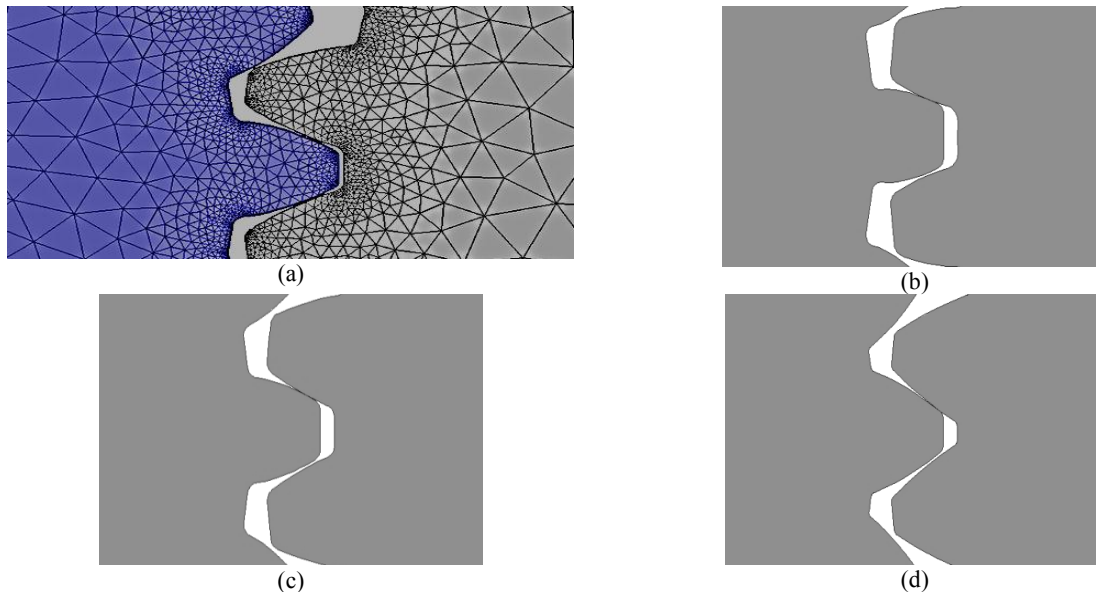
Model of gear meshes by (a) finite element with (b) 20° (c) 25° and (d) 30° pressure angle of gears.
